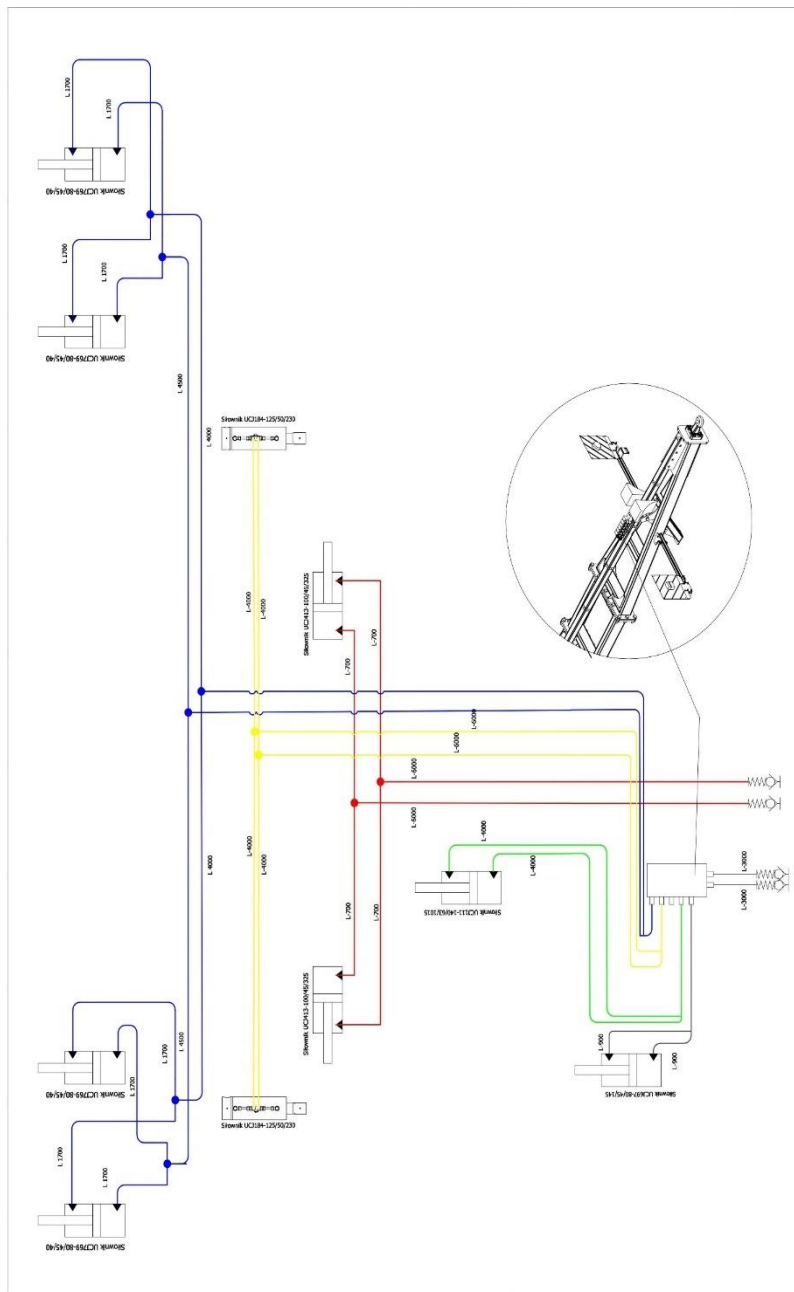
Diagram of the machine's hydraulic system with valve block fitted.
